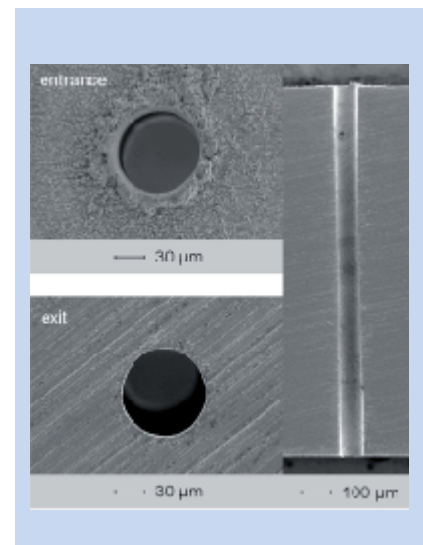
Micro-hole (ø 70 µm) in 1 mm thick steel plate (helical drilling, λ = 1.06 µm).
